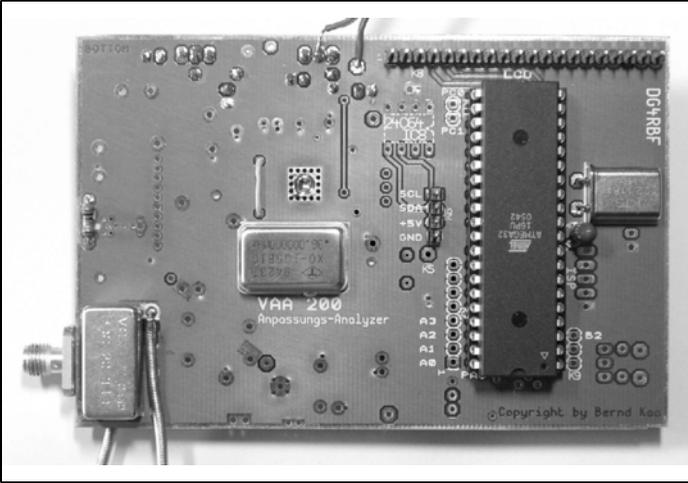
Picture of the top side of the vector analyser PCB showing the ICs and wired components.
